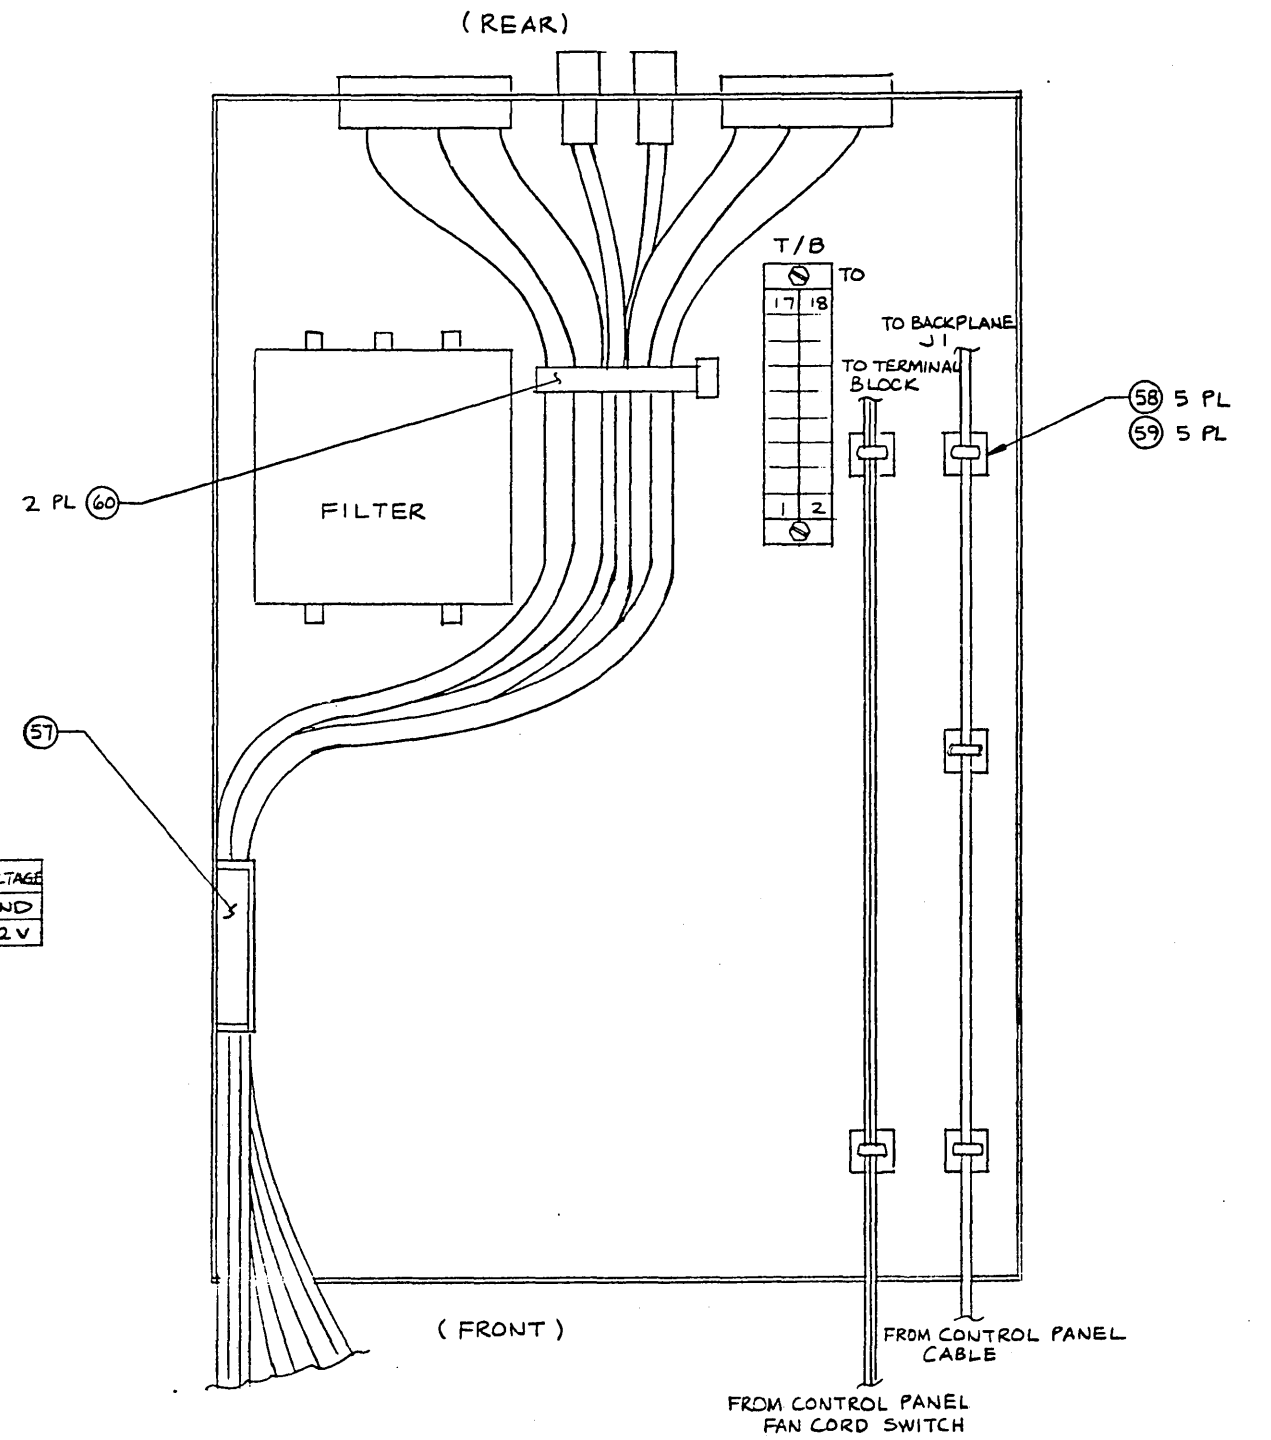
Final Assembly, Chassis, Sheet 3 of 3
